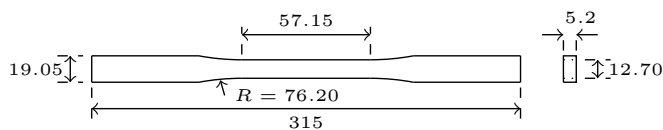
Dimensions in mm of the ASTM Type I specimen used for tensile testing (all dimensions are in mm).
